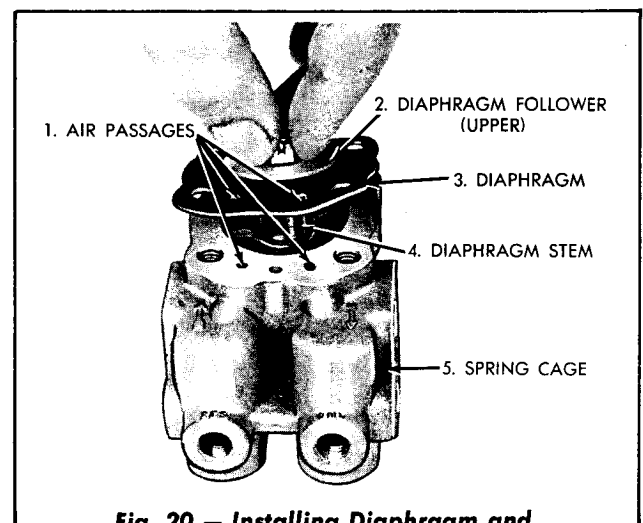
Installing Diaphragm and Stem Assembly in Spring Cage
